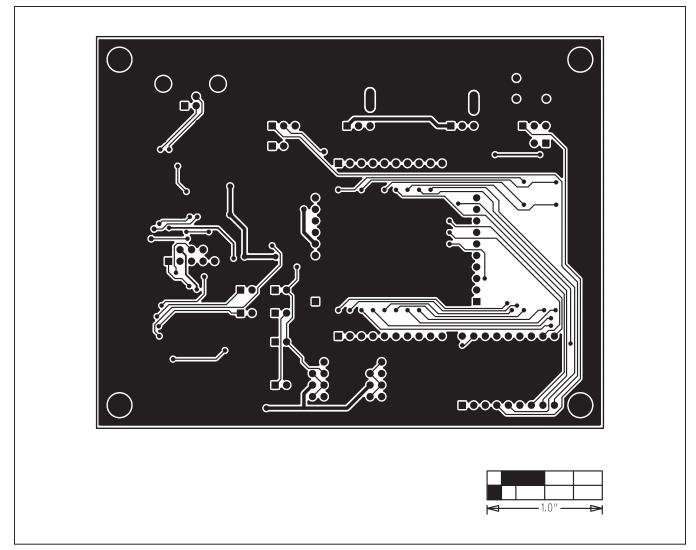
MAX6956 EV Kit PCB Layout—Solder Side
